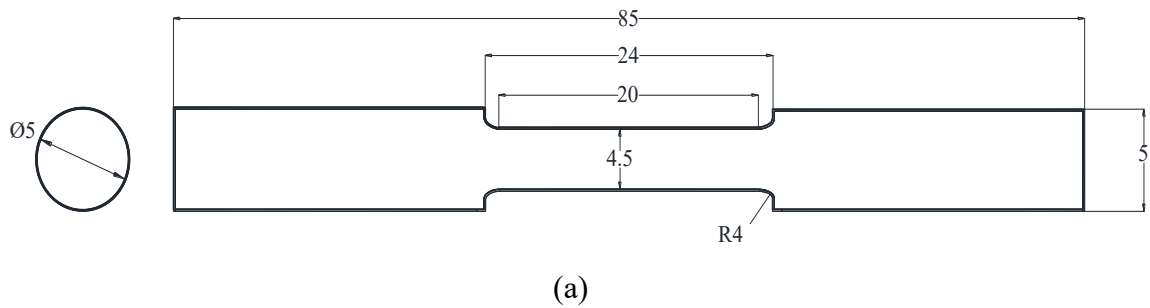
Bed Joint Reinforcement Coupon Detail
